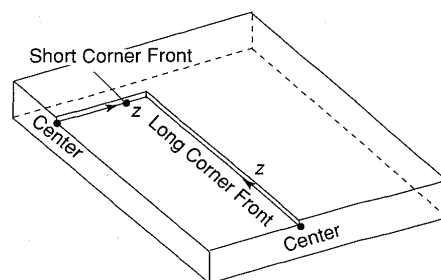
Short and long corner fronts in a lower portion of the molding resin
